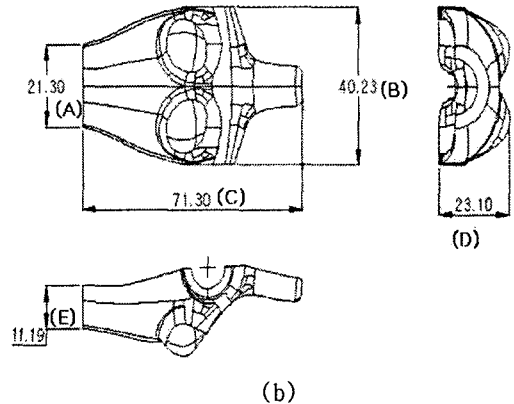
(b) Dimension accuracy analysis of the measured dimension
